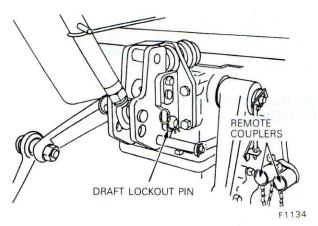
Hydraulic Lift Rocker and Remote Couplers — Single Spool Valve
